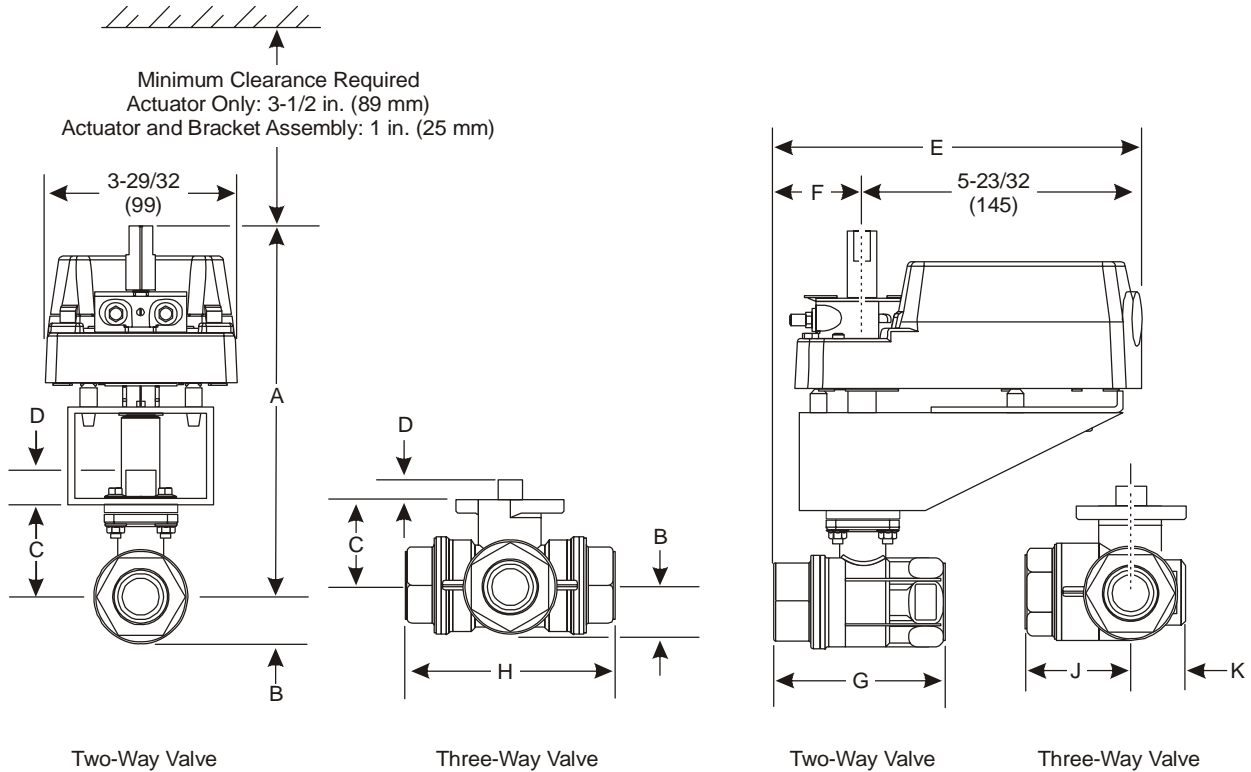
Actuated Ball Valve Dimensions, in. (mm)
